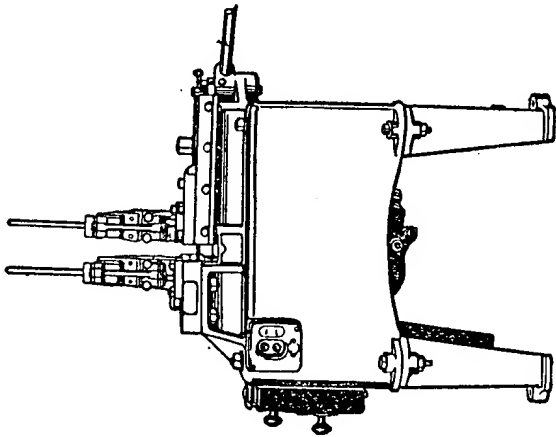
Typical butt-welding machine used mainly for the welding of solid uniform sections.
